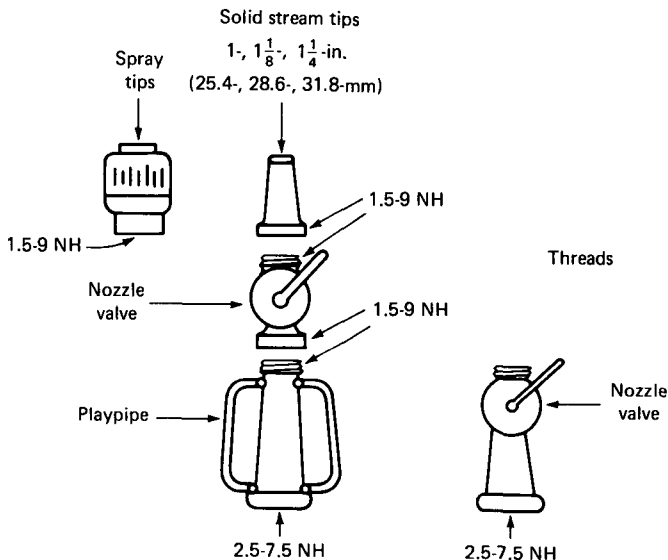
Nozzle assembly for 2½-in. (65-mm) hose.
